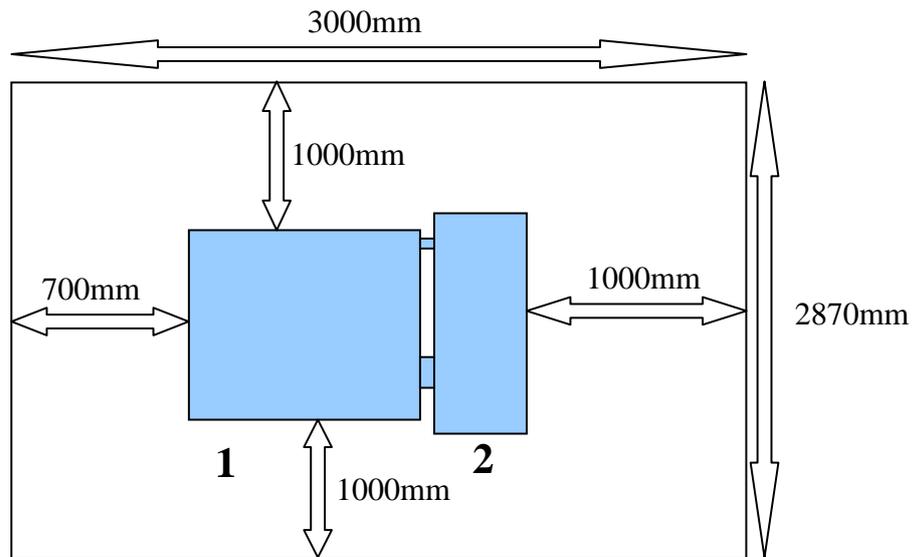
Machine surroundings: minimal distance from walls and operator's working setting.
